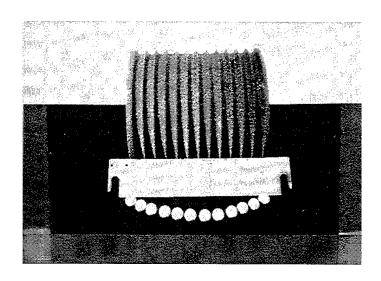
Special Grinding Wheel used in the Centerless Grinder for Producing Balls from Rods.
